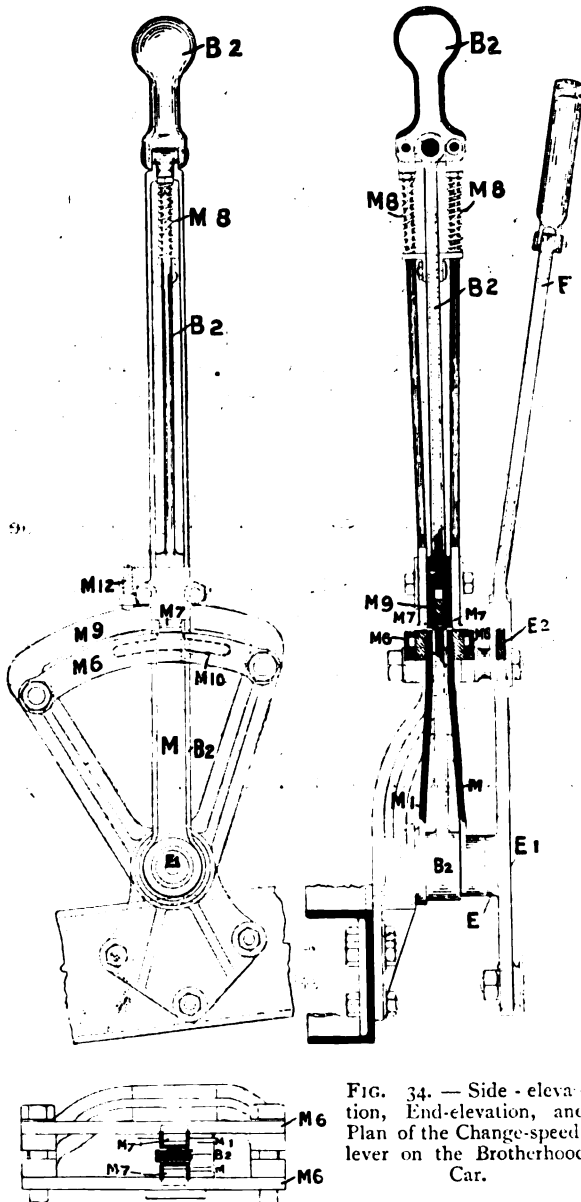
Side elevation, End-elevation, and Plan of the Change-speed-lever on the Brotherhood Car.
